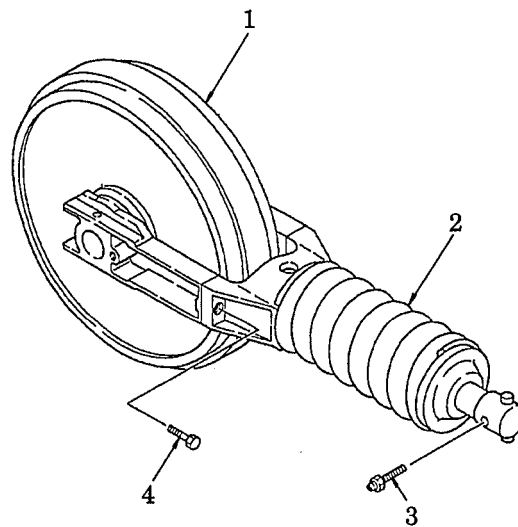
Separating idler assy (1) from idler adjuster assembly
